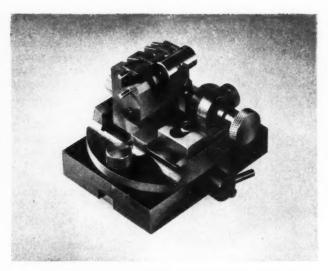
"See-All" Thread Staging Fixture Brought out by the Engineers Specialties Division
